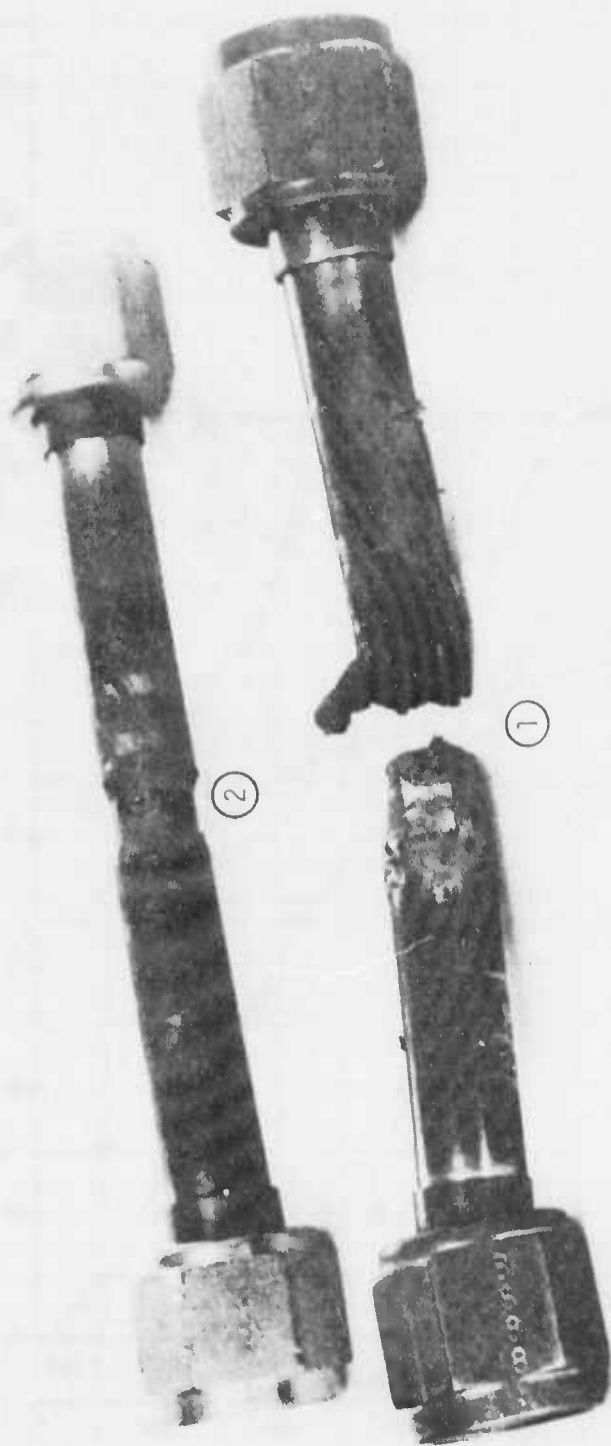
5. Welded Specimen Holders: (1) Heated to Failure (2) Heated Until Threshold Events Occurred
